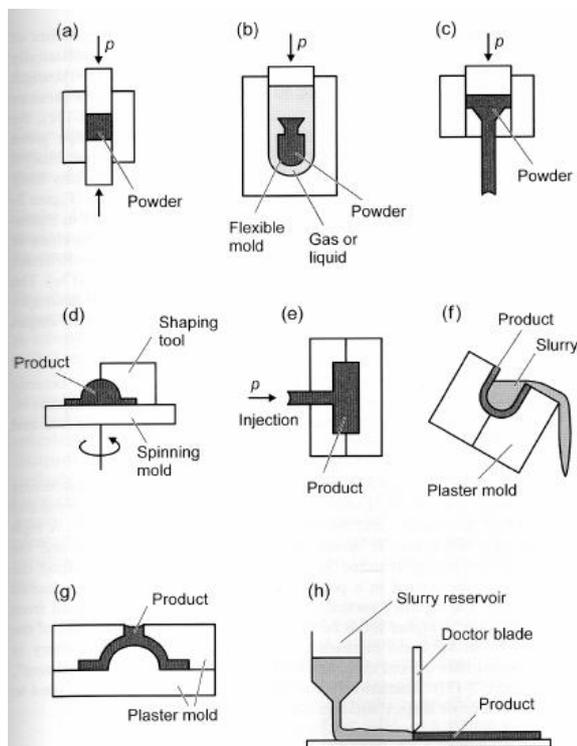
Forming processes of ceramic powders ( $p$  = pressure). (a) Dry pressing; (b) isostatic pressing; (c) extrusion; (d) jiggering; (e) injection molding; (f) drain casting; (g) solid casting; and (h) tape casting.
